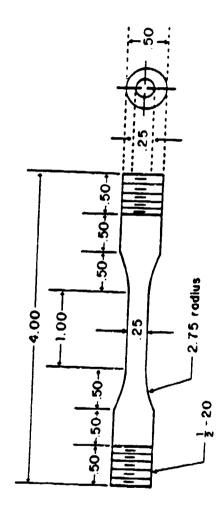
Uniform Gage-length Tensile Specimen Dimensions
